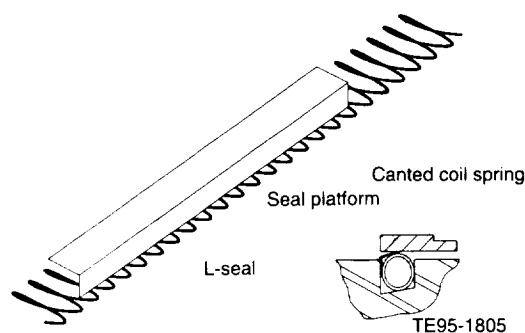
The unique canted coil spring provides a simple, inexpensive means of providing nearly uniform loading to the secondary L-seal.
